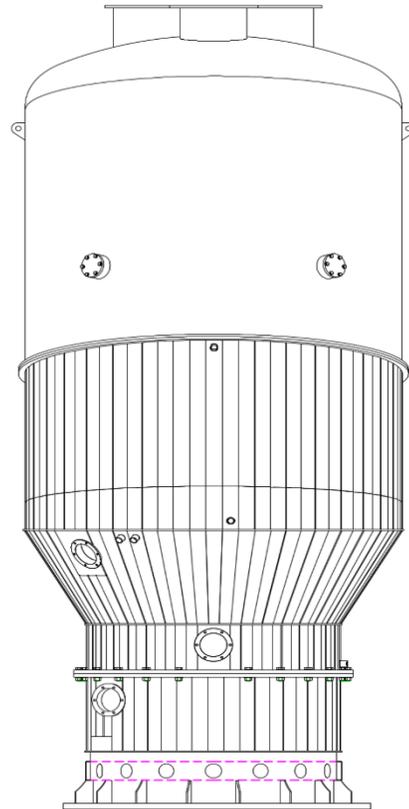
Construction drawing of the shaft furnace where cooling of the lower part of the shaft is realized with ILTEC Technology
